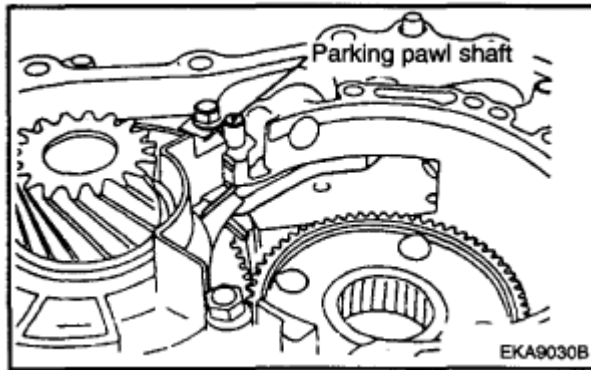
Locating Parking Sprag, Shaft And Sprag Spring
